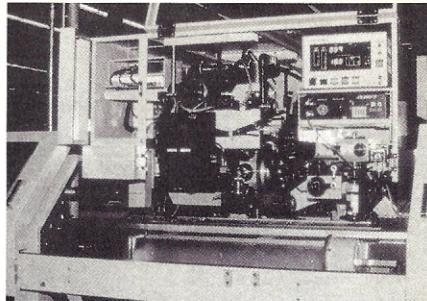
The cover of the Automatix TDK assembly robot slides away to reveal PCBs being populated with surface-mount components and afterward inspected by the same machine.
